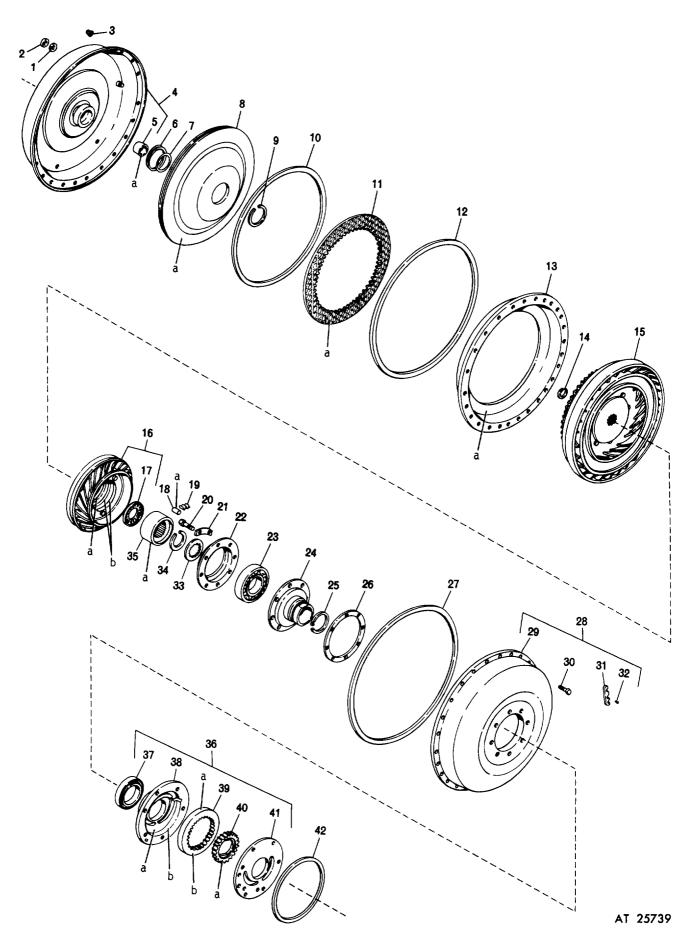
Lockup clutch. torque converter. and front oil pump-exploded view.
